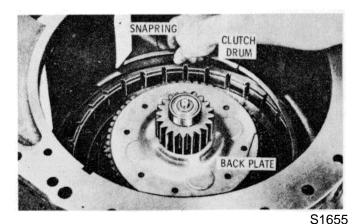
Removing Fifth-and-Sixth-Gear Clutch Snap Ring and Backplate
